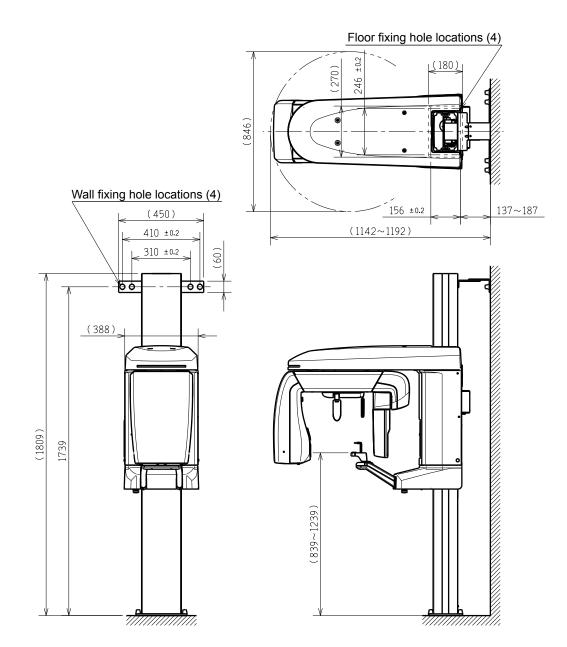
Fixing hole location measurements (Standing position wall-mount short type: Panoramic type)
